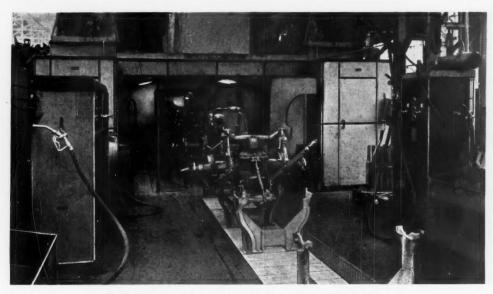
The entrance to the paint spray booth on the final assembly conveyor
